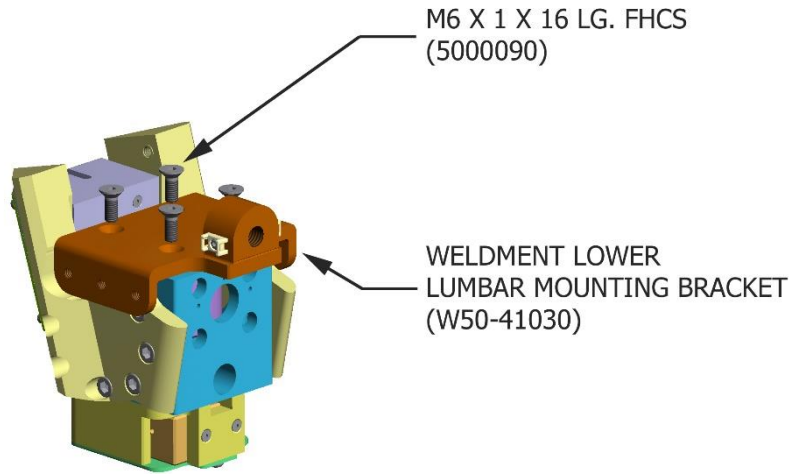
Removing the lower lumbar mounting bracket weldment.
